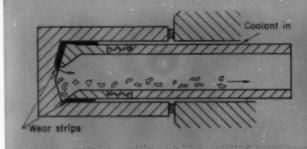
Chips are removed through center of boring bar. Coolant is fed between bar and work. Wear strips stabilize boring tool in deep-hole operations.
